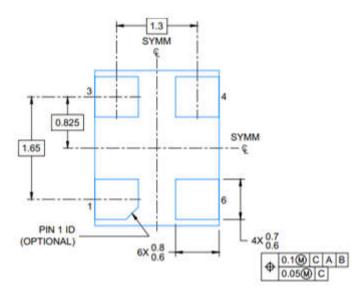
LMK6C Oscillator in 4-Pin, 2.5mm × 2.0mm DLF Package
